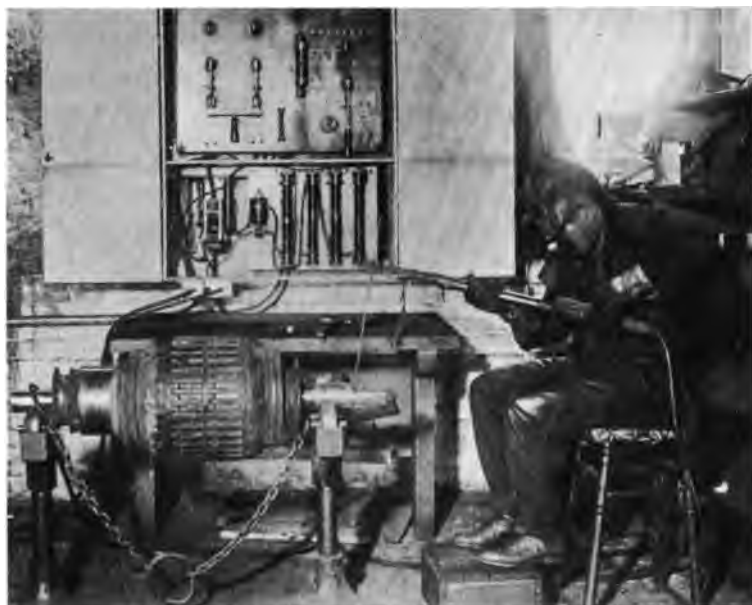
Automatic Switch controlled by Spring Button in Handle, to safeguard Electric Welder.
